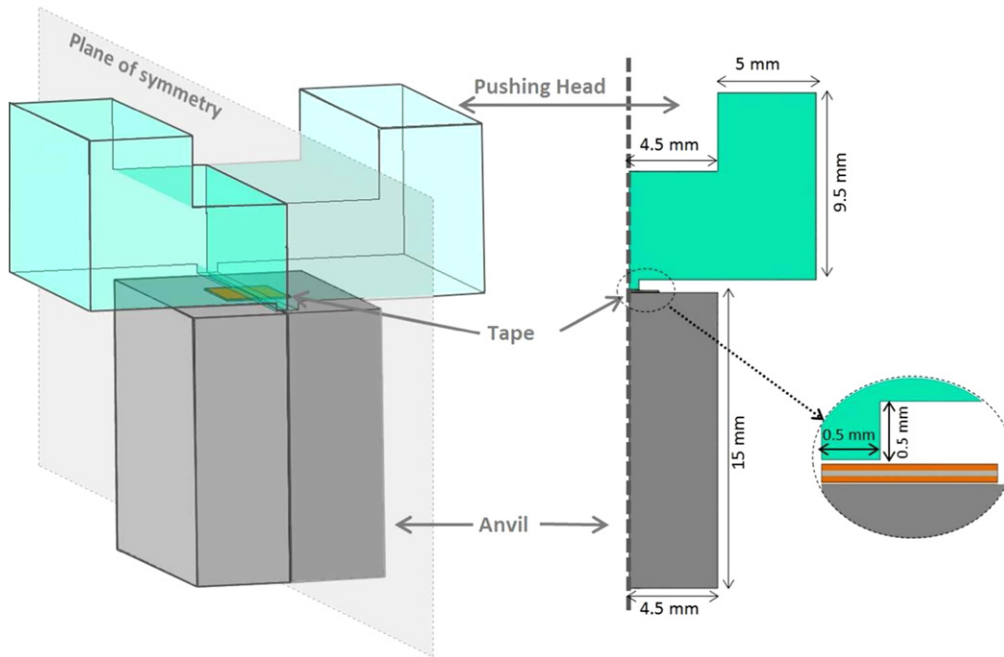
The assembly of the press setup, showing a piece of tape, anvil and pushing head by isometric view (left) and by side view (right).
